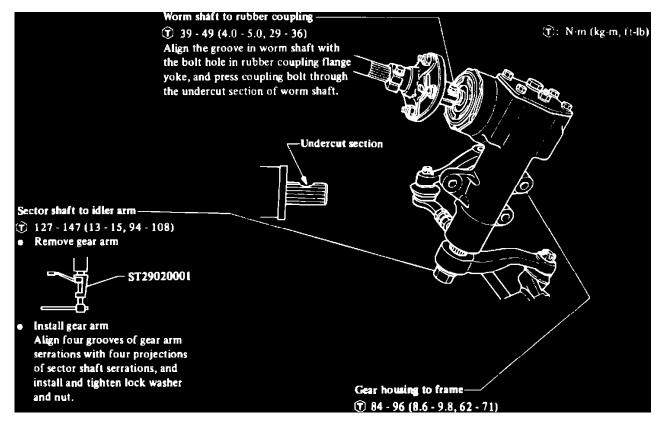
Typical manual steering gear replacement. Pathfinder & Pickup
